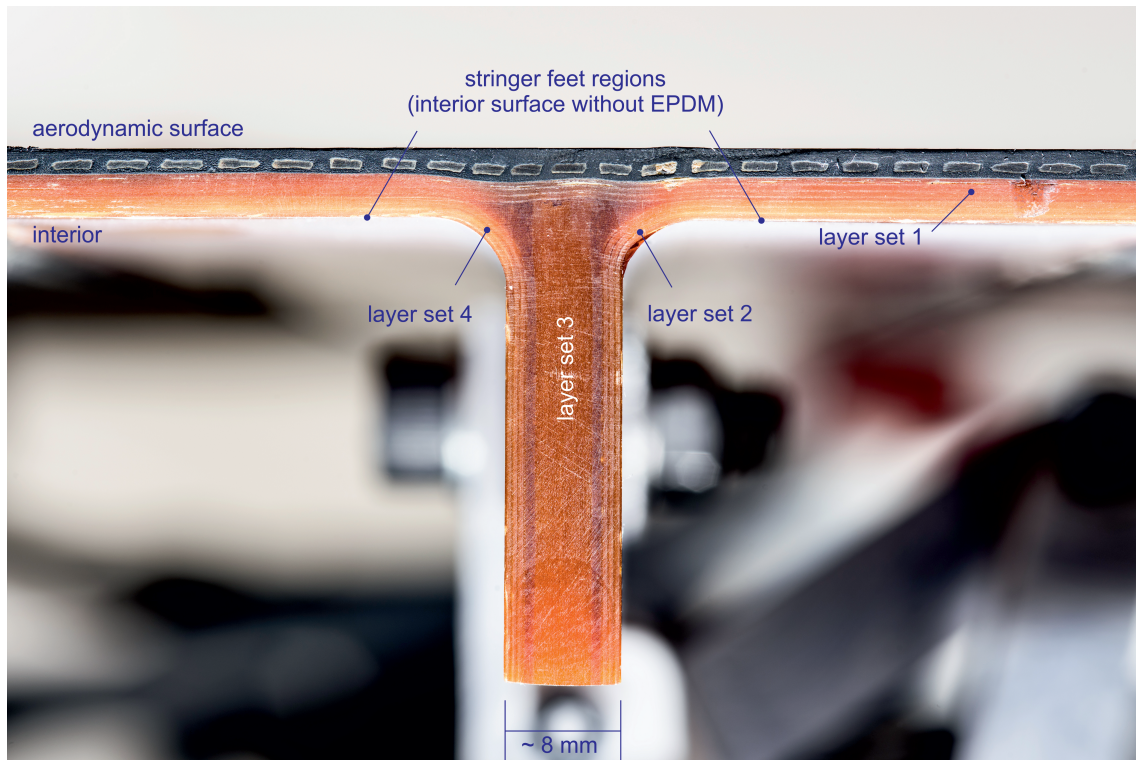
Labelled cross-section-detail photograph of the manufactured integral stringer.
